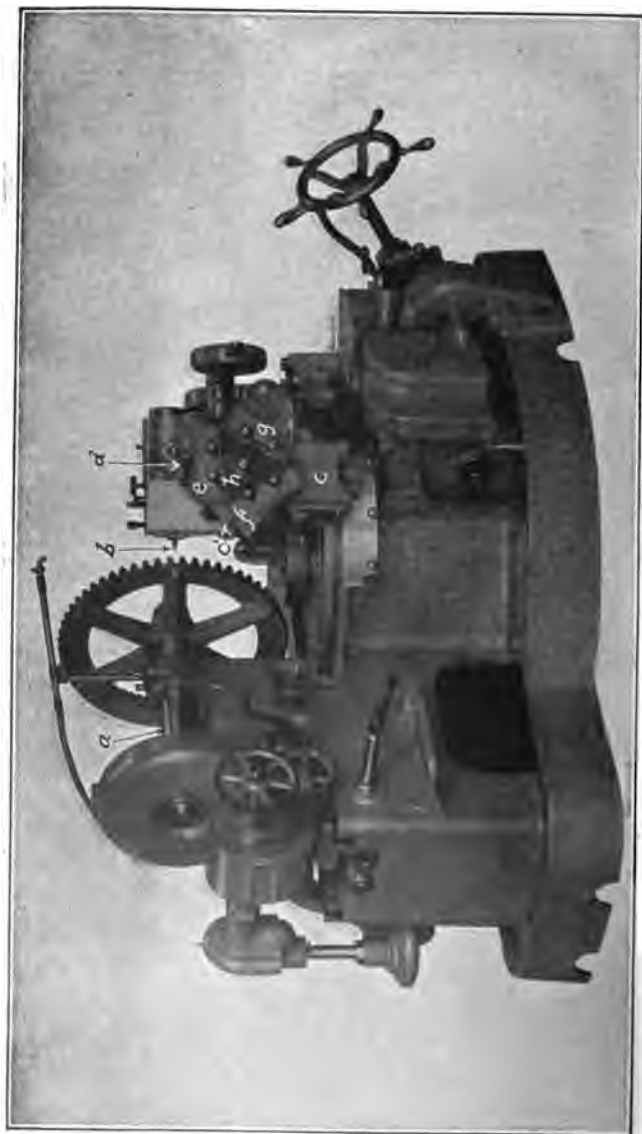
AUTOMATIC BEVEL-GEAR MILLING MACHINE
